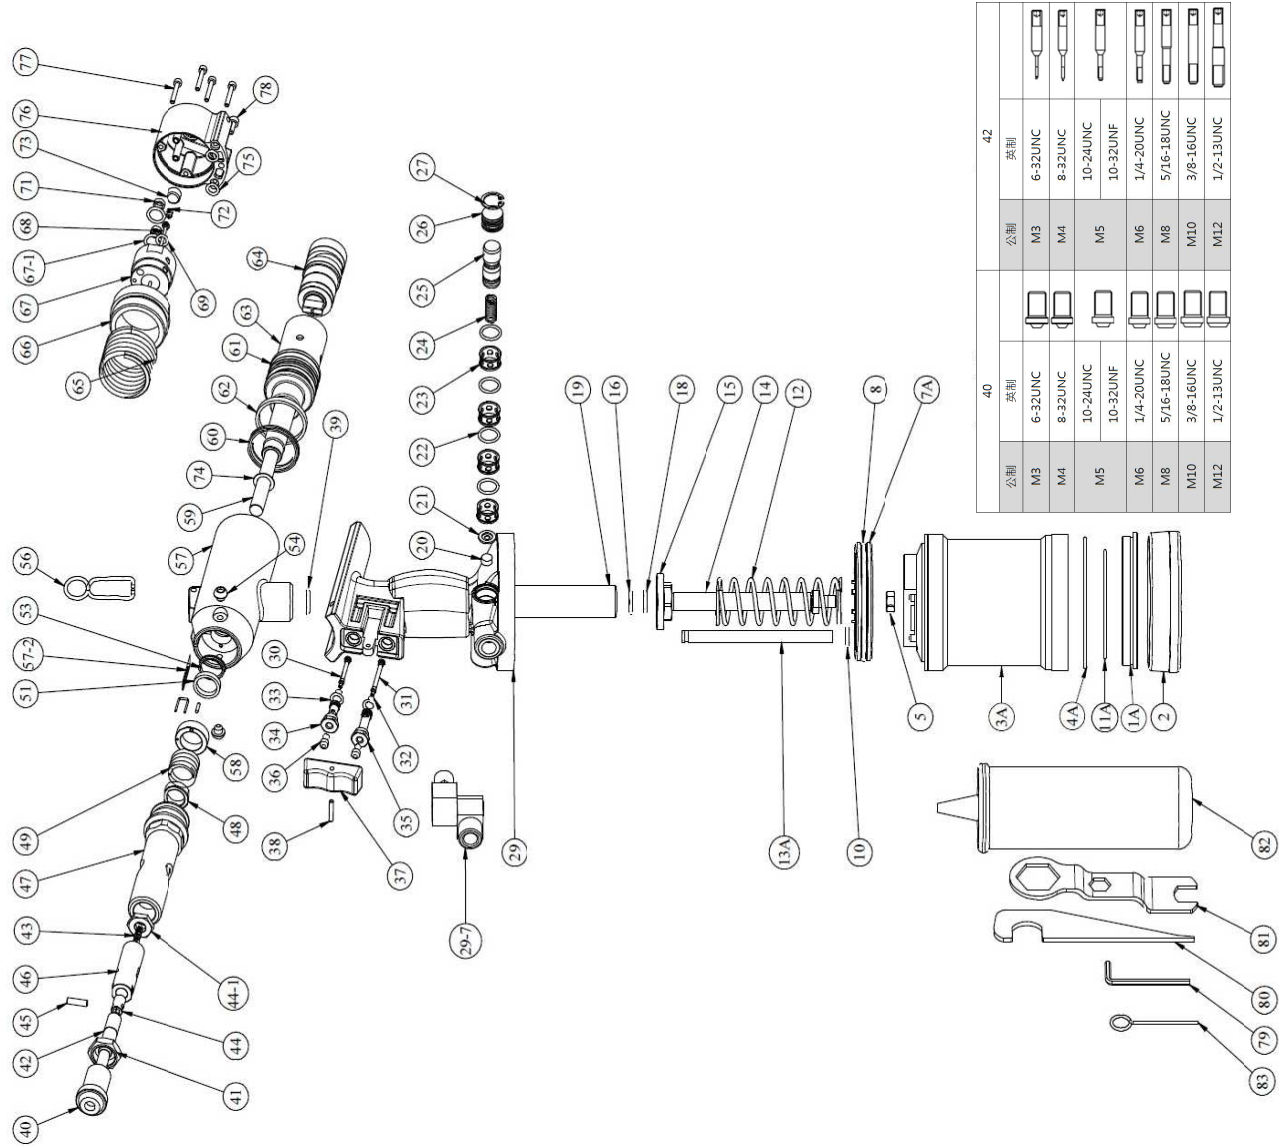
EXPLODED VIEW OF AIR RIVET NUT TOOL
